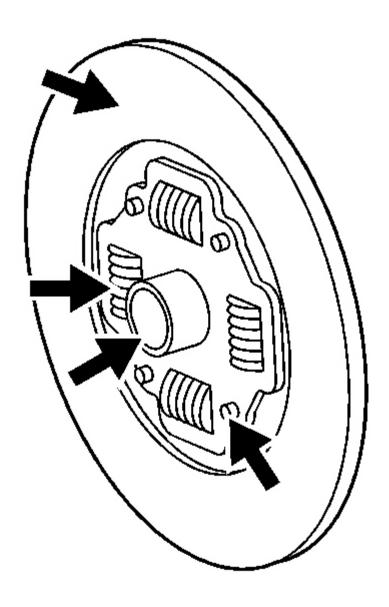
Inspecting The Clutch Disc For Damage Courtesy of GENERAL MOTORS CORP.
